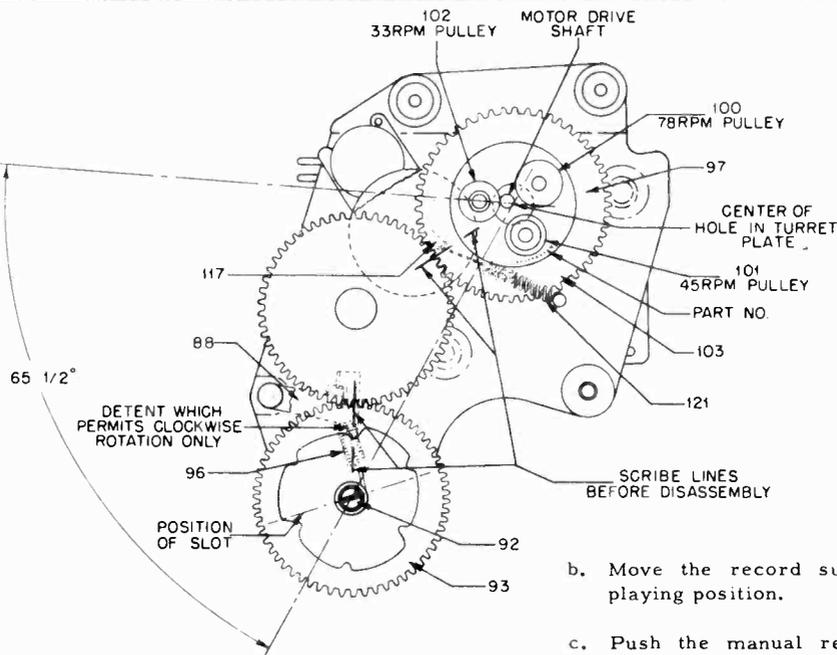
MOTOR GEAR TRAIN ASSEMBLY
